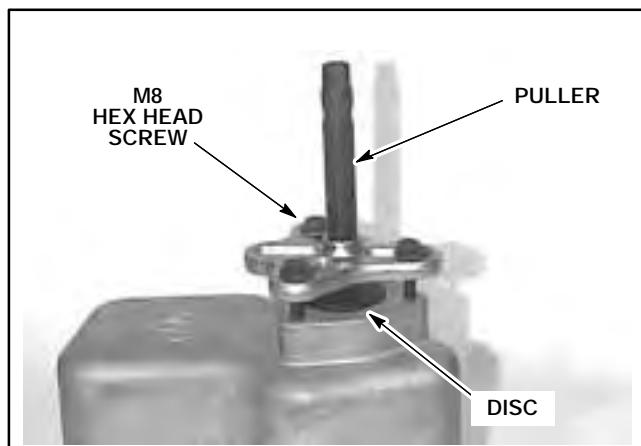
Rocker Cover Removal Tool P/N 472074
